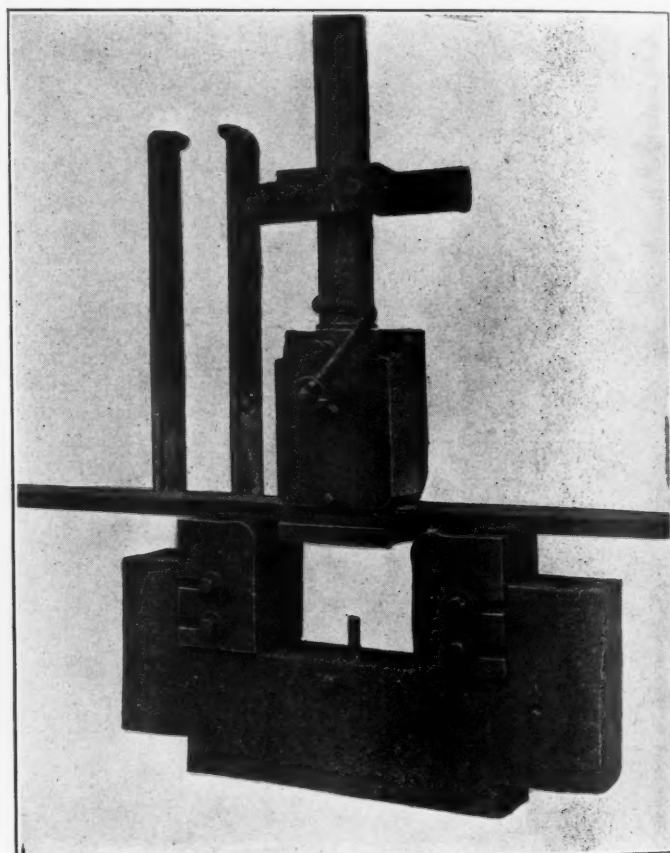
COMBINATION TOOL FOR BENDING AND PUNCHING DRAWBAR POCKETS.
